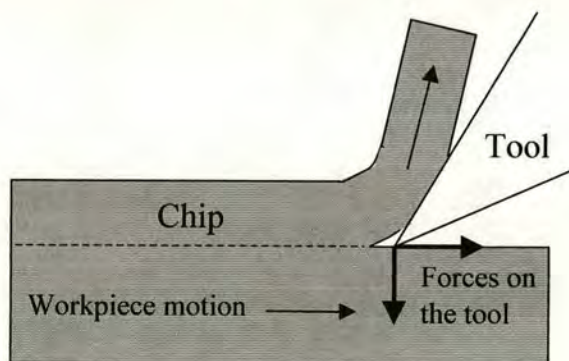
Principle of conventional metal cutting (machining). A workpiece is moved against a sharpened tool and part of it is cut away as a chip.
